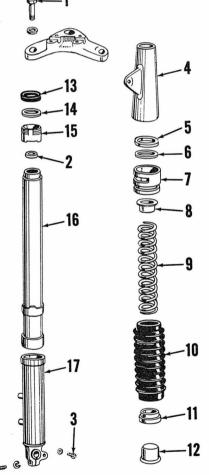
Exploded view of front suspension unit typical of type used on F1, F2 and early F3 models.
